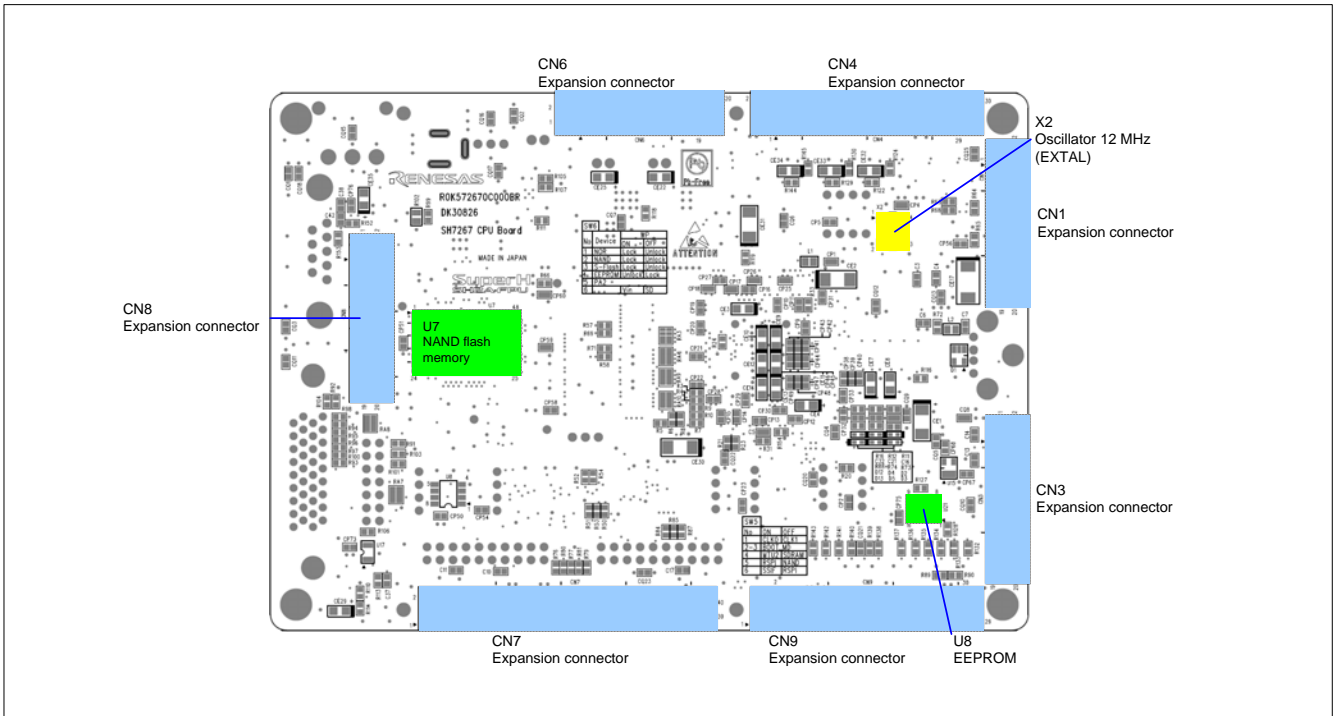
R0K572670C000BR Layout and Component Placement (Top View of the Solder Side)
